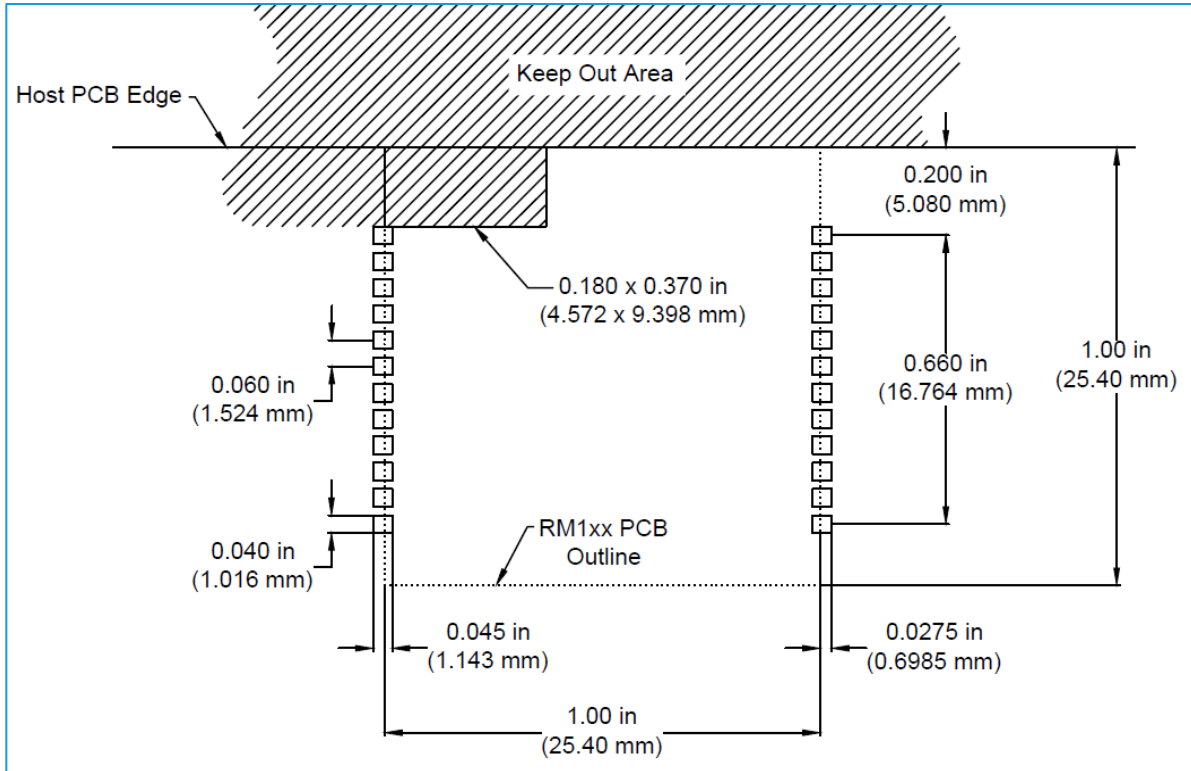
BLE Chip Antenna Keep-Out and Module Placement Example on DVK-RM1xx PCB
